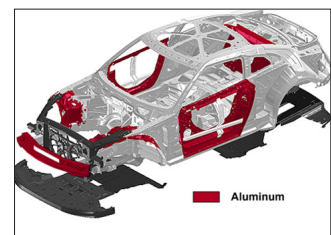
The front strut towers, door shells, and rear bulkhead are cast aluminum.
